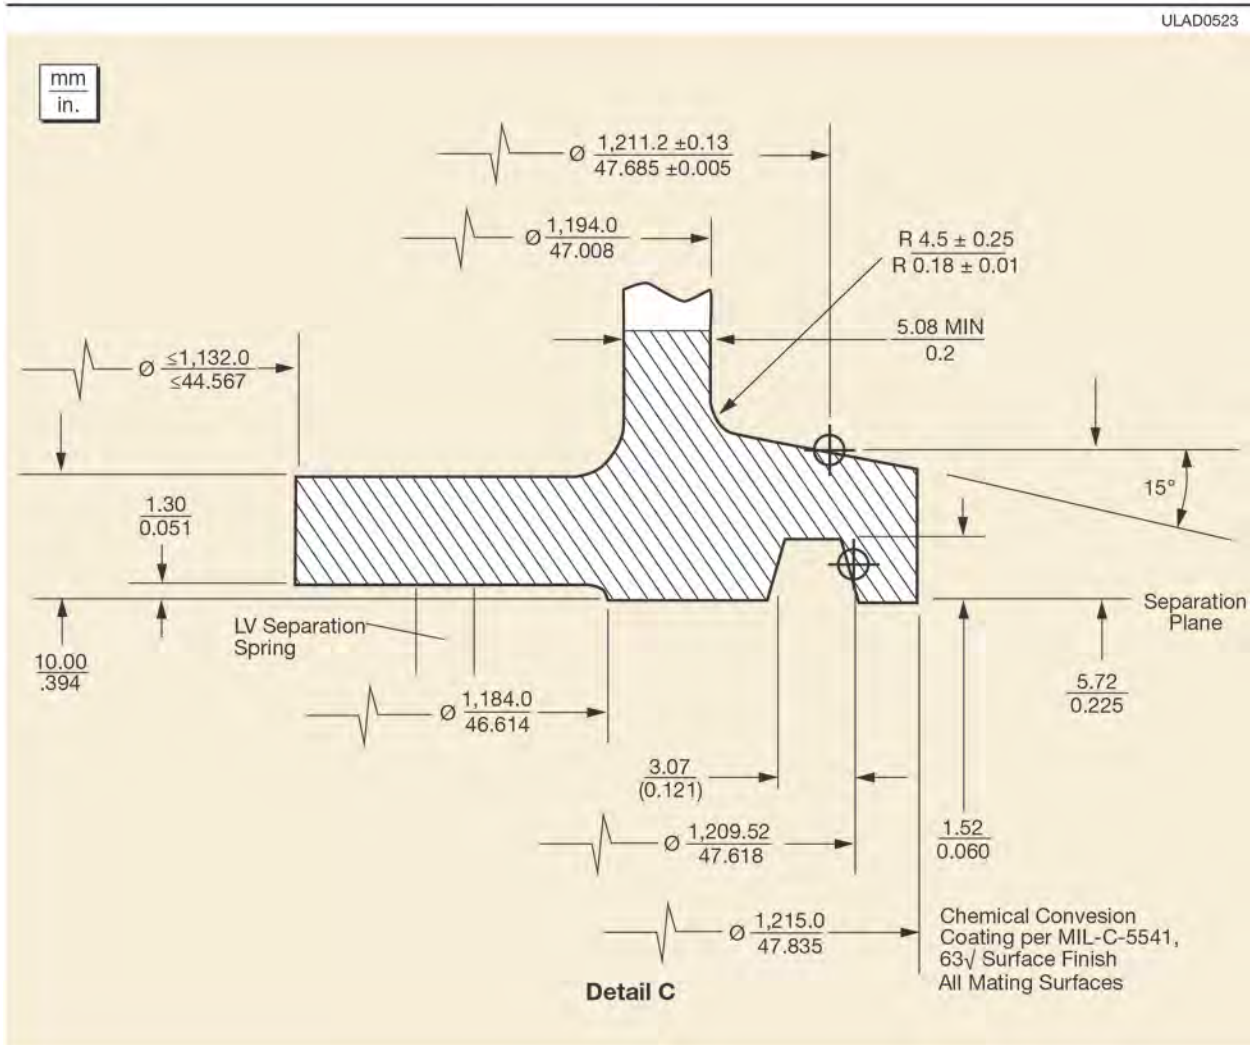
B1194 PLA Spacecraft Interface Dimensional Constraints
